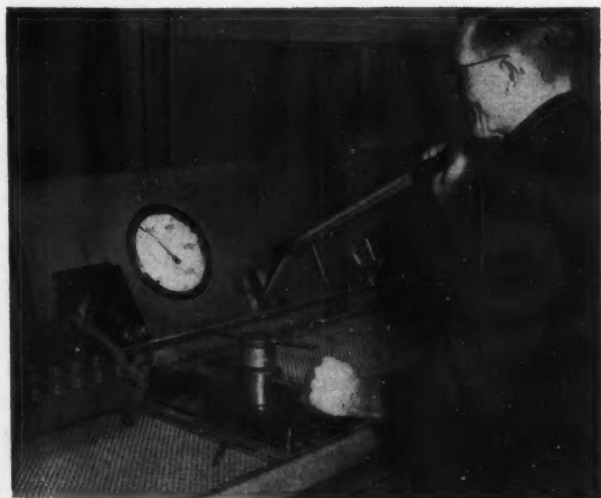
On this hydraulic rig, the assembled relief valves are set to release at 3,655 lb. per sq. in., ± 40 lb. per sq. in., and are subsequently tested for re-seating, by applying pressure with the hand pump
